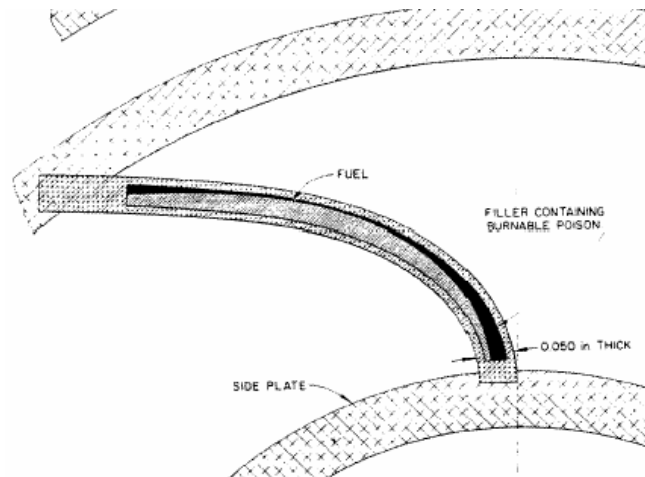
IFE showing one plate with the fuel cladding, and the aluminum side plates holding the fuel plates together.
